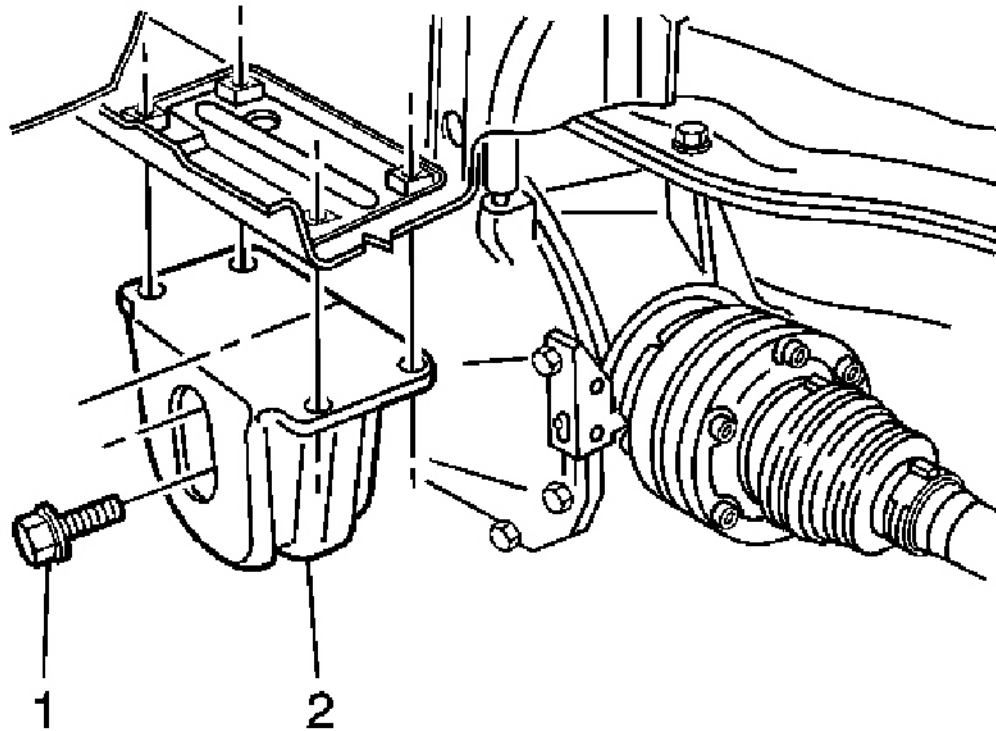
View Of Rear Mount & Differential Carrier Cover Bolts
